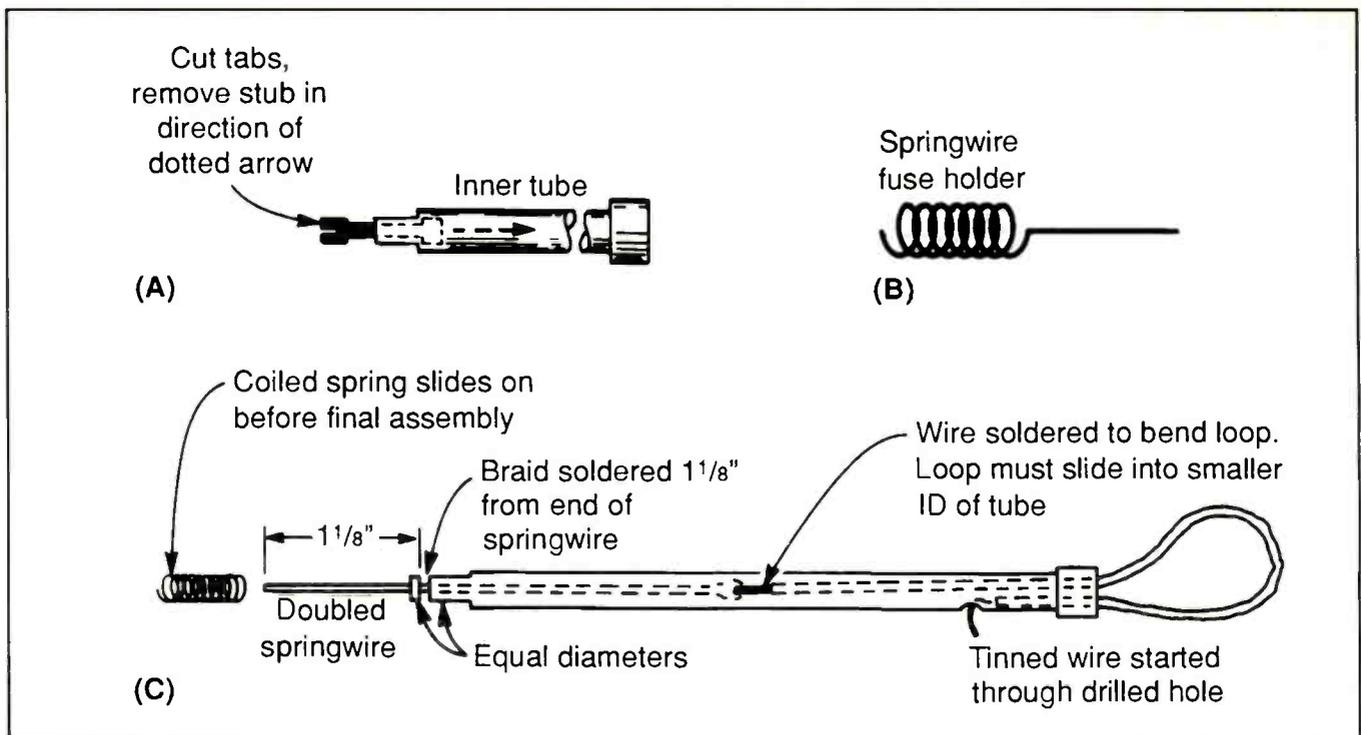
A. After the inner tube is withdrawn from the pencil, the tabs are cut and the stub removed. B. is a drawing of a springwire fuseholder. In C, the springwire assembly is slid into the inner tube until the braid touches the tube's end. The tinned end of the hookup wire is pushed through the drilled hole.
